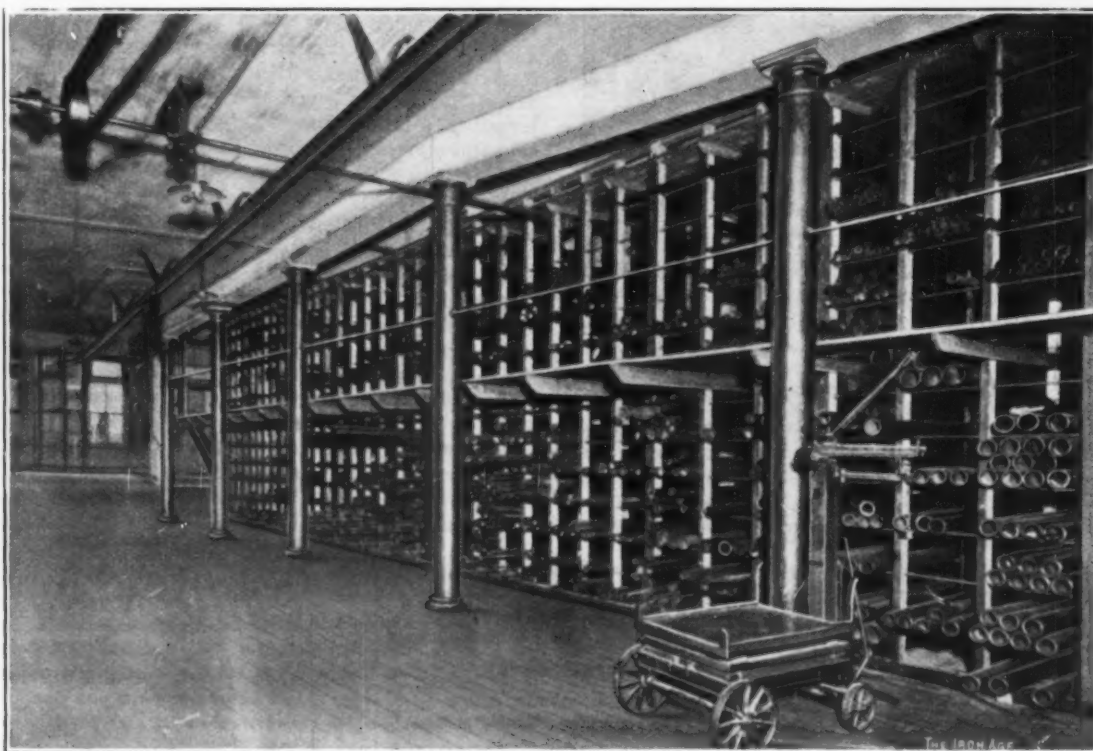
Tube Rack Adaptable Also to Rods, Bars, Shafting, &c.
